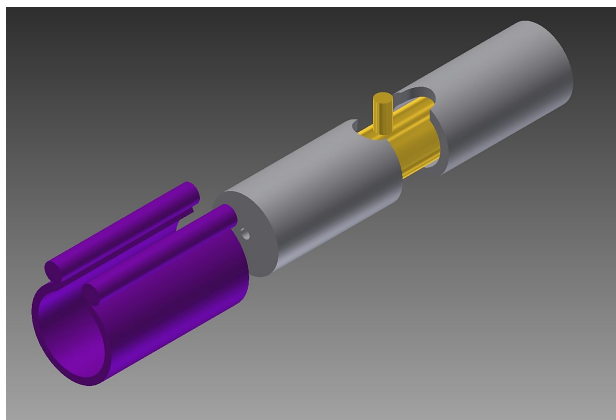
CAD drawing showing the architecture of the Te cell assembly inside the enclosure. The yellow part is the cell, the gray are the stainless steel covers (stainless steel because aluminium has melting point near 600°C and we are heating to about 550°C) and the purple is the ceramic band heater used to heat the cell.
